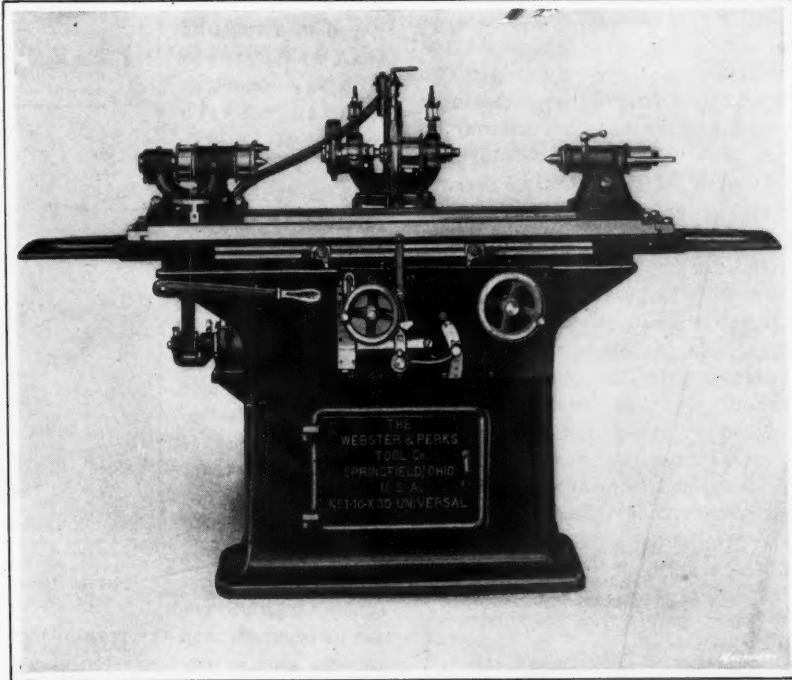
No. 1 Universal Cylindrical Grinder built by Webster & Perks Tool Co.
